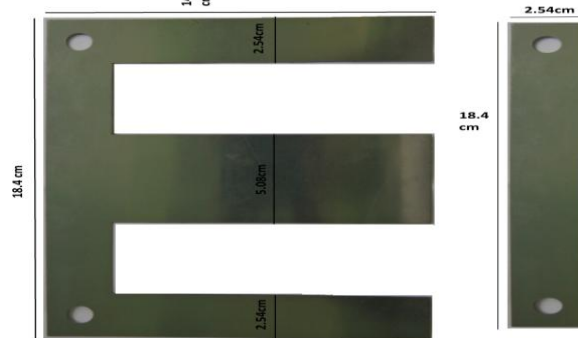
E & I lamination Dimensions used for Fabrication of Transformer
